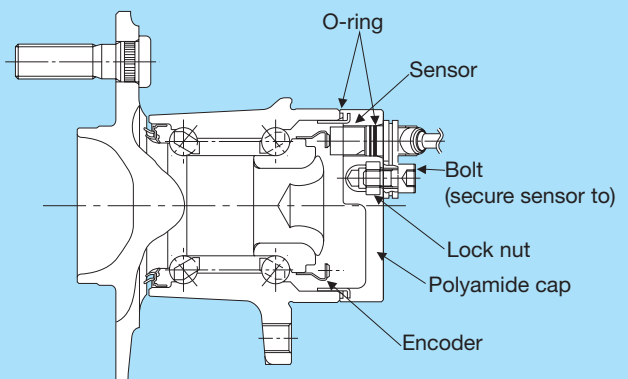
Hub unit bearing with end-cap sensor (separated type)
